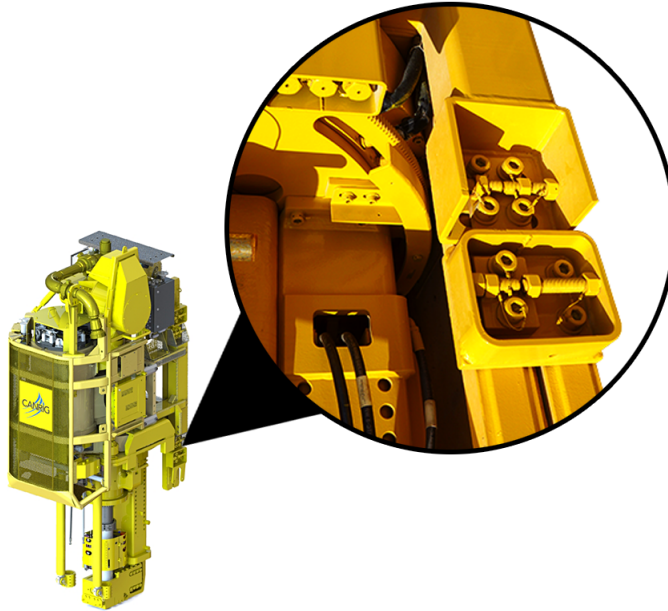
Adjustment Bolts on Guide Runner Assembly for Canrig 1250 Models
